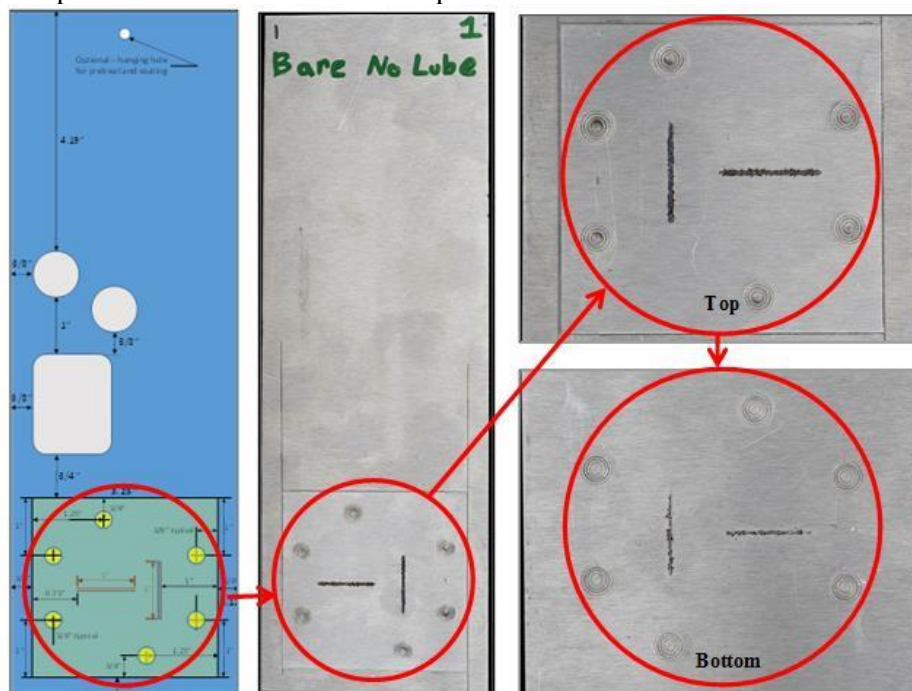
Mini-door assembly schematic (left), full welded assembly (center), and close-up top and bottom views of welded area (right) for bare EFP Batch #3 material with no lubricant.
